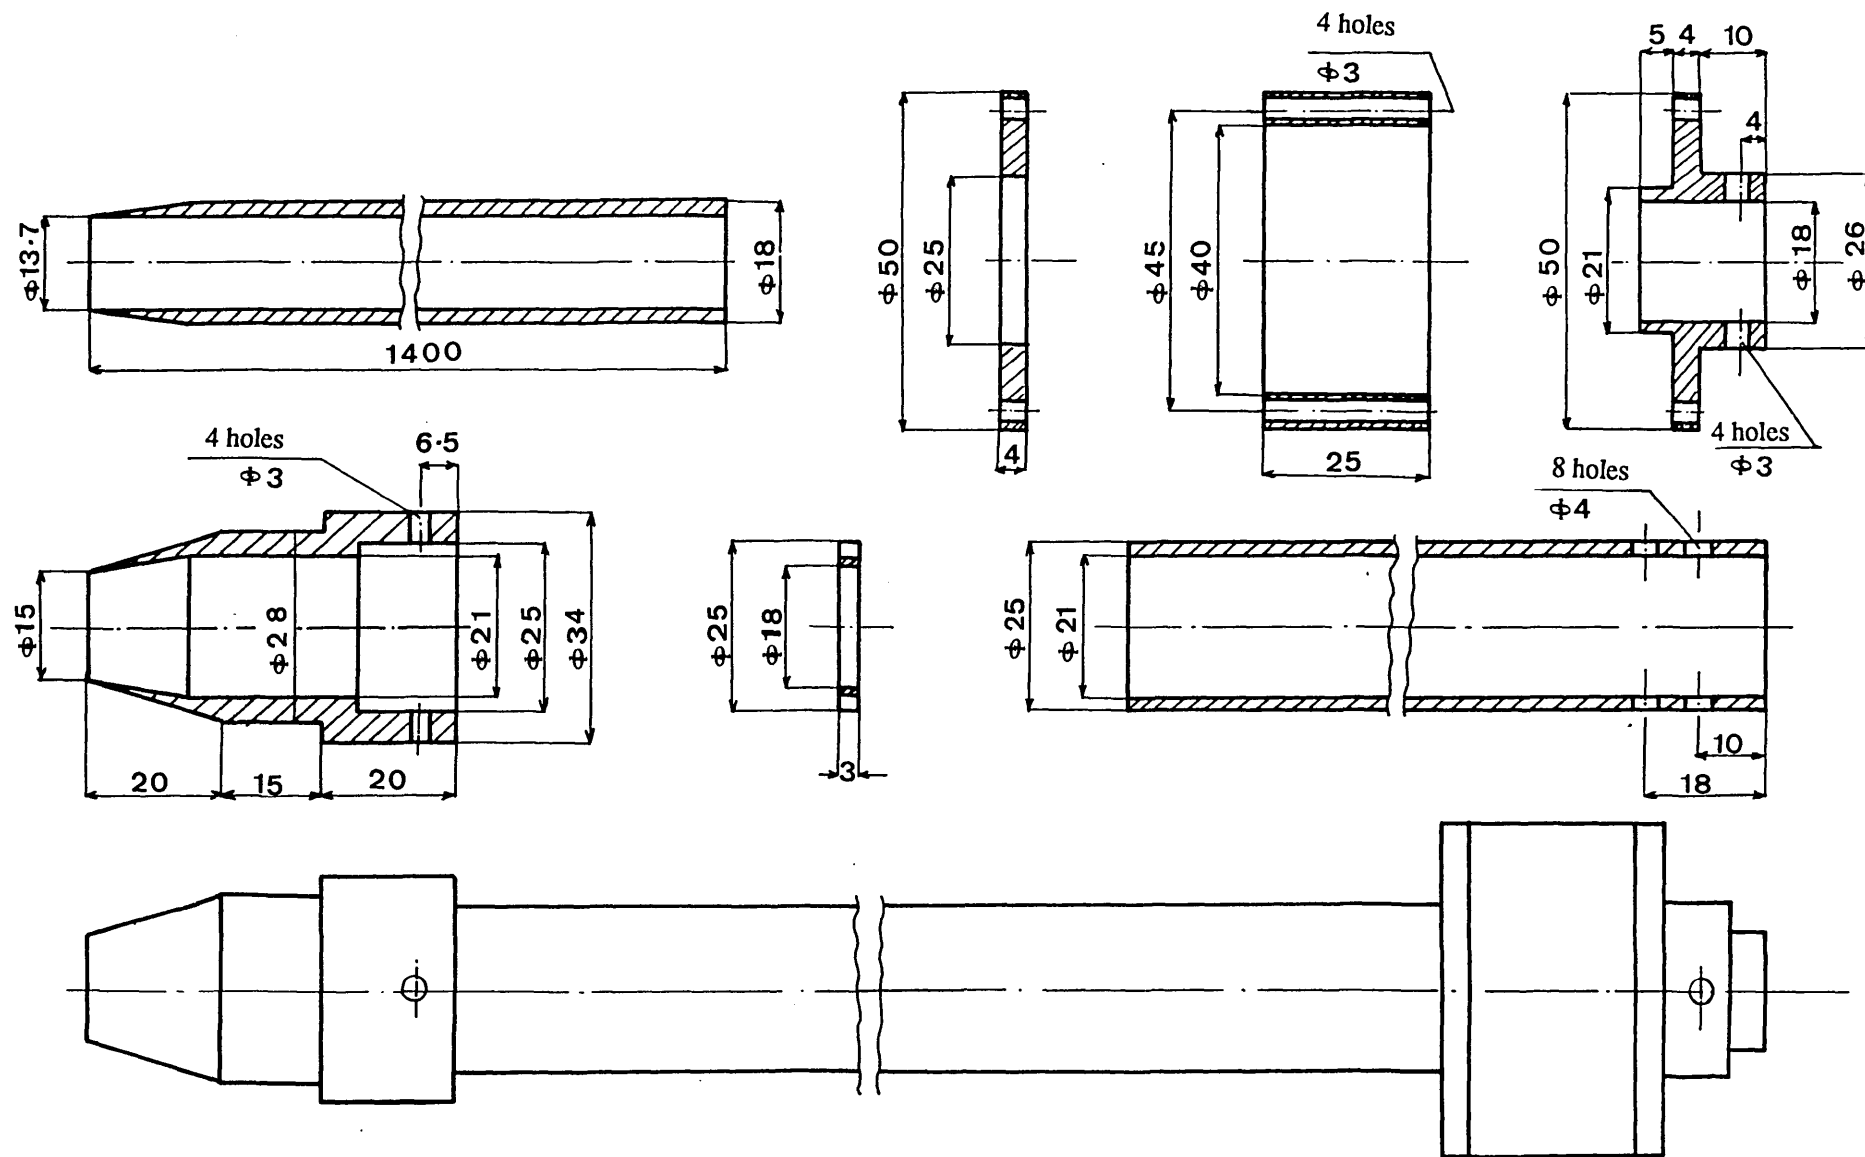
Burner dimensions and annular pilot flame tube arrangement.
